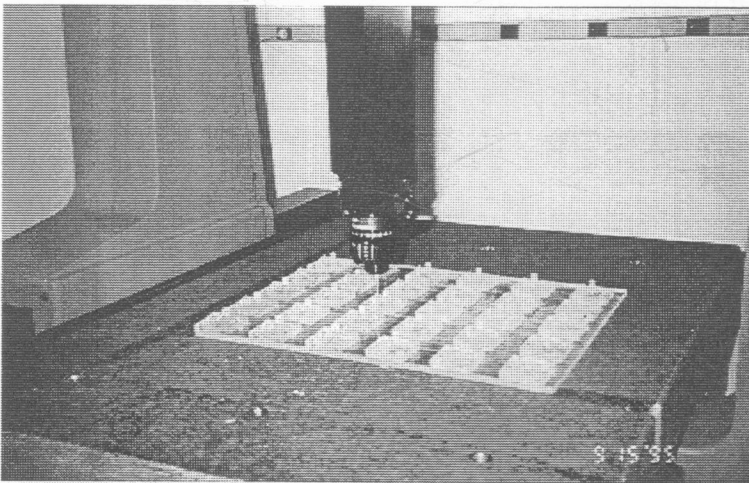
Batch measurement and local alignment techniques used in the CMM measurement
